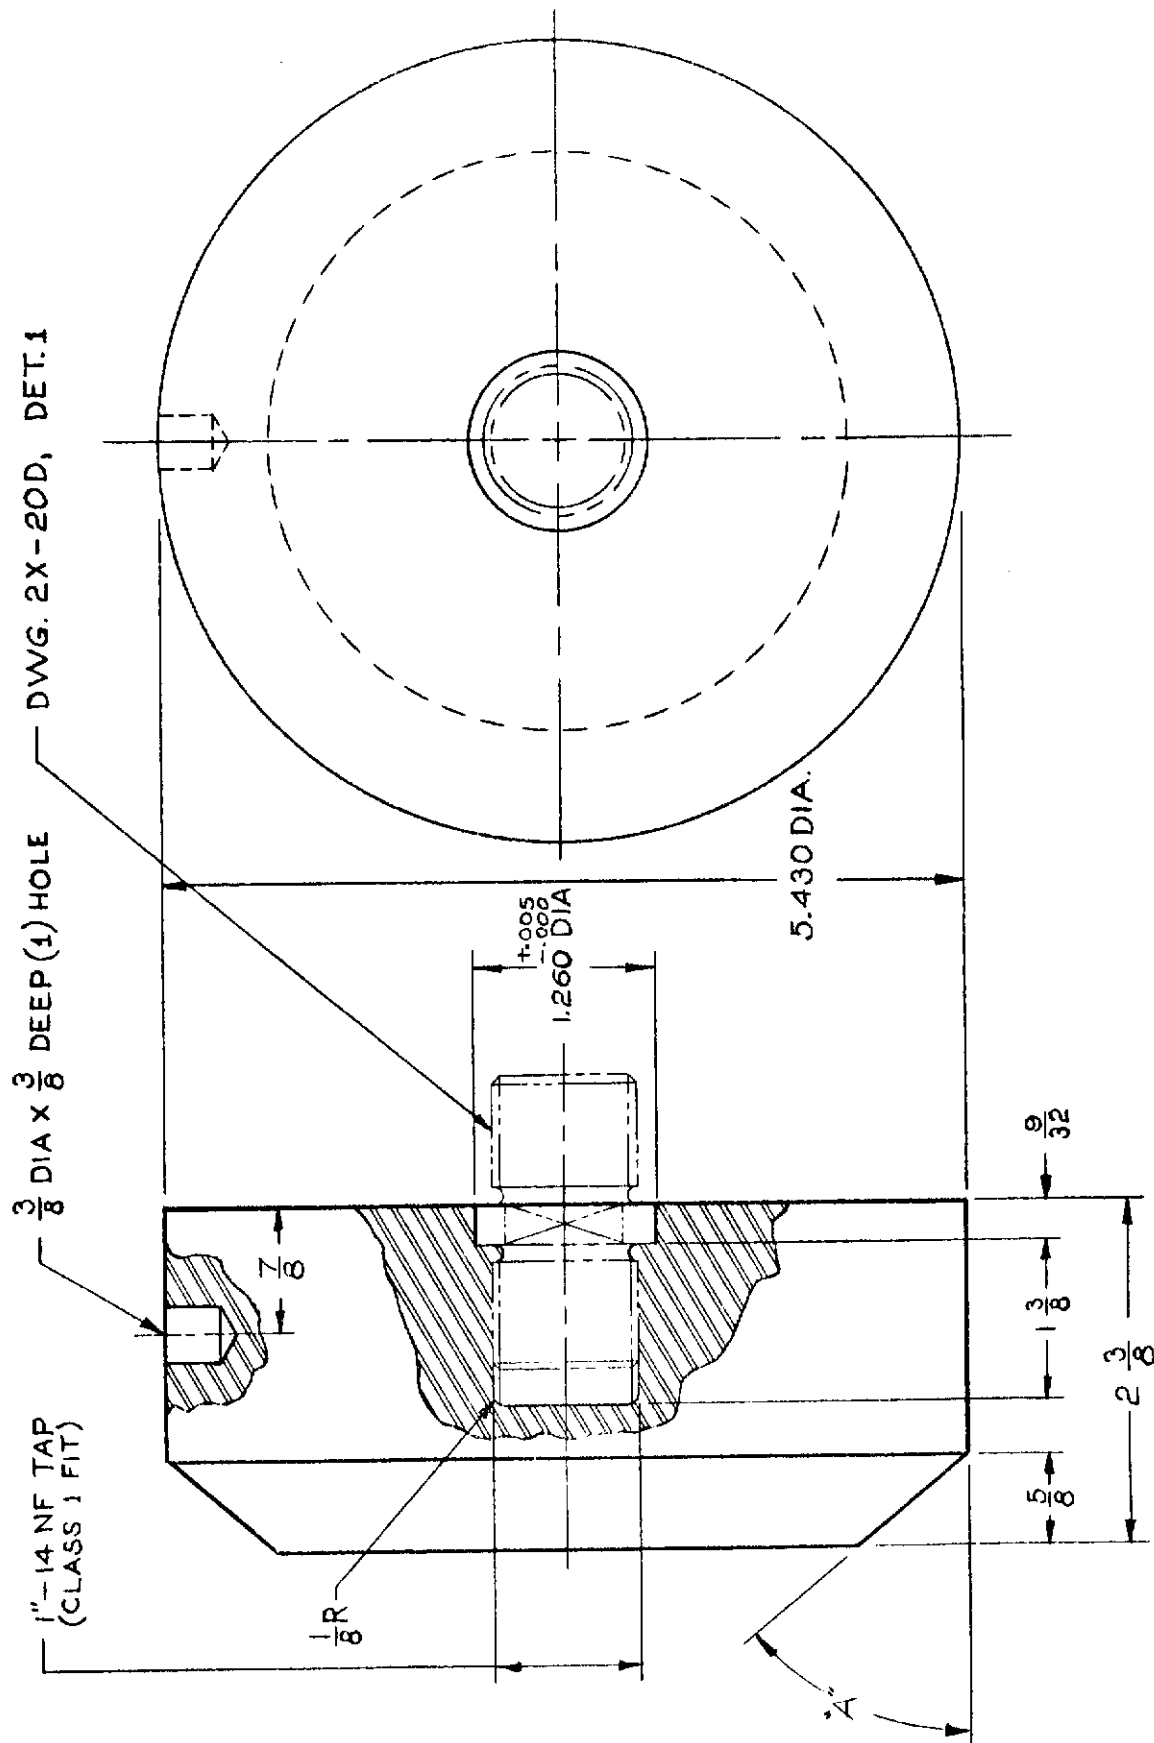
THE BERYLLIUM CORP. SKETCH ILLUSTRATING DESIGN DETAILS OF DUMMY BLOCK AND RELATED EQUIPMENT EMPLOYED IN BERYLLIUM EXTRUSION DEVELOPMENT.
